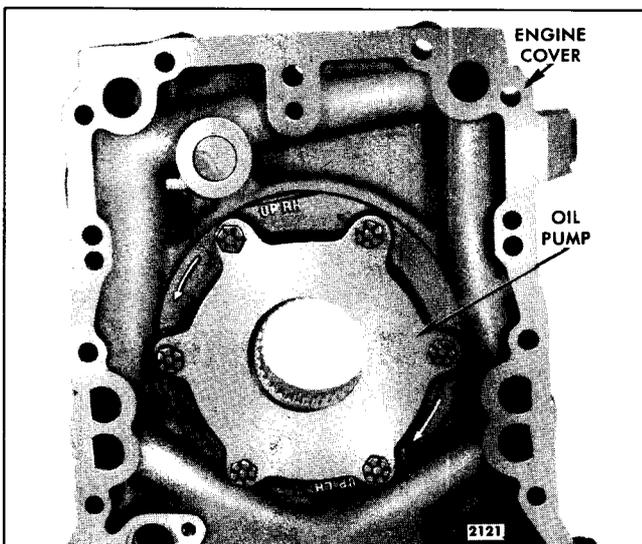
Typical Right-Hand Rotation Oil Pump Mounting
